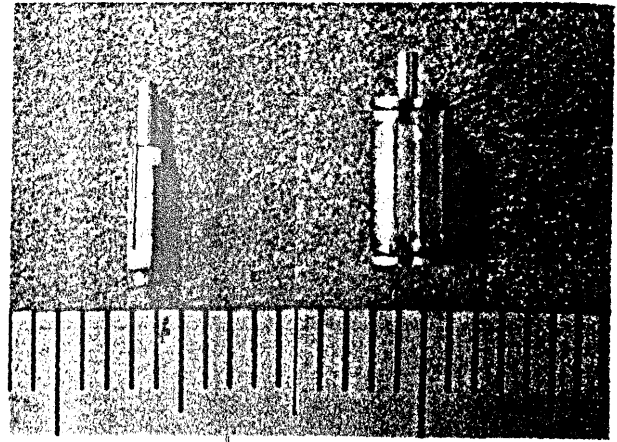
Photocopy of ECF motor (left) and rotor (right)
